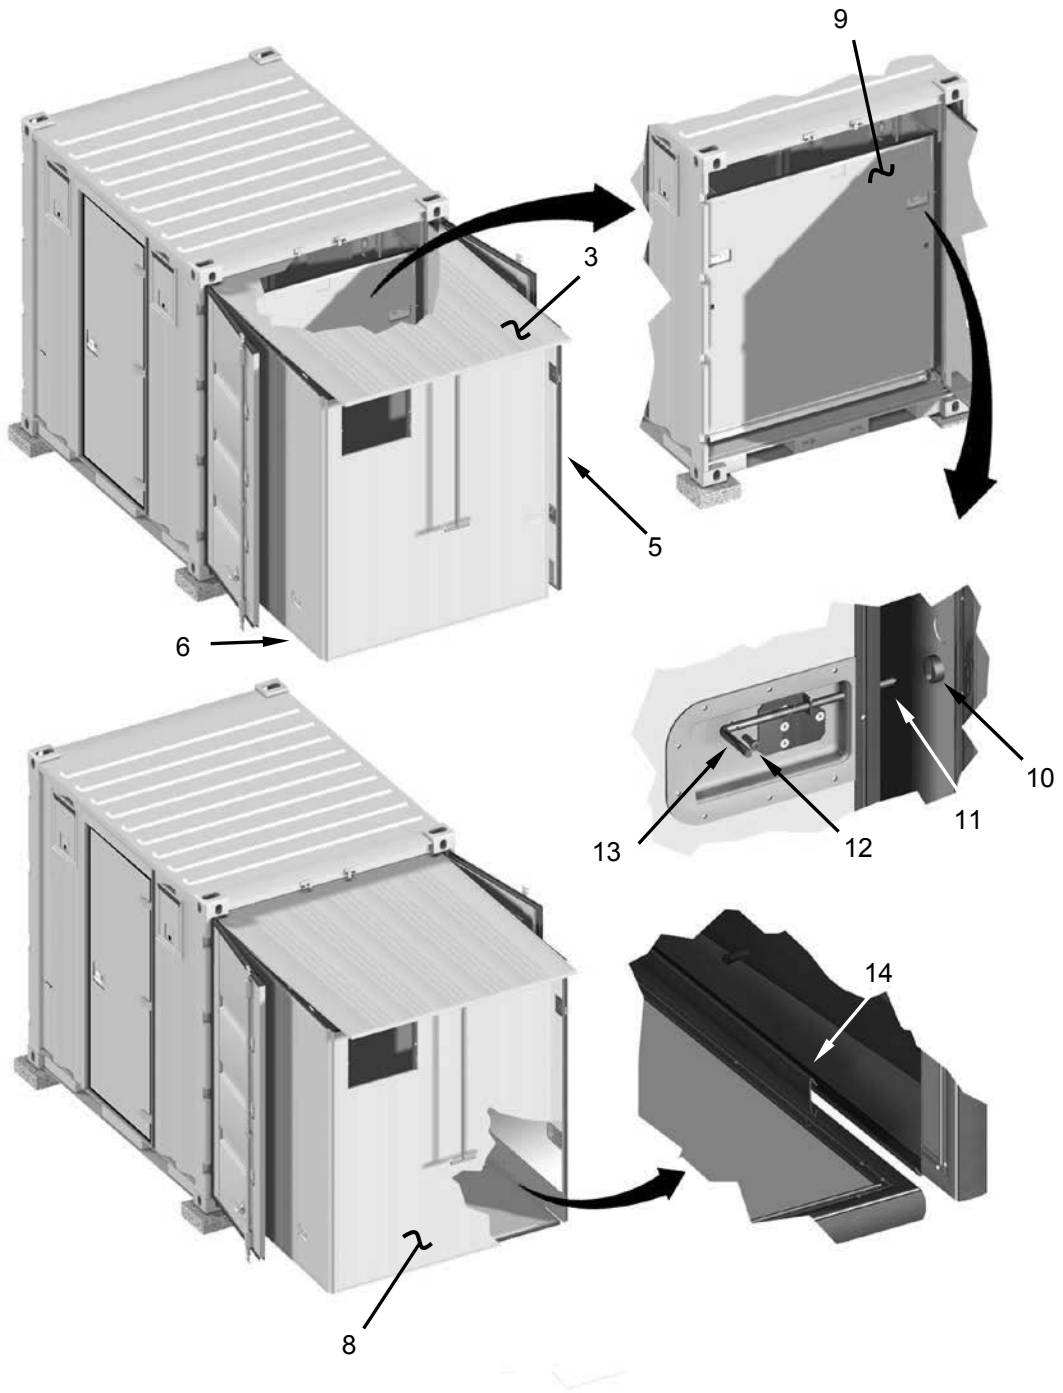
Unfolding Roof, Walls, and Floor (Sheet 2 of 2).
